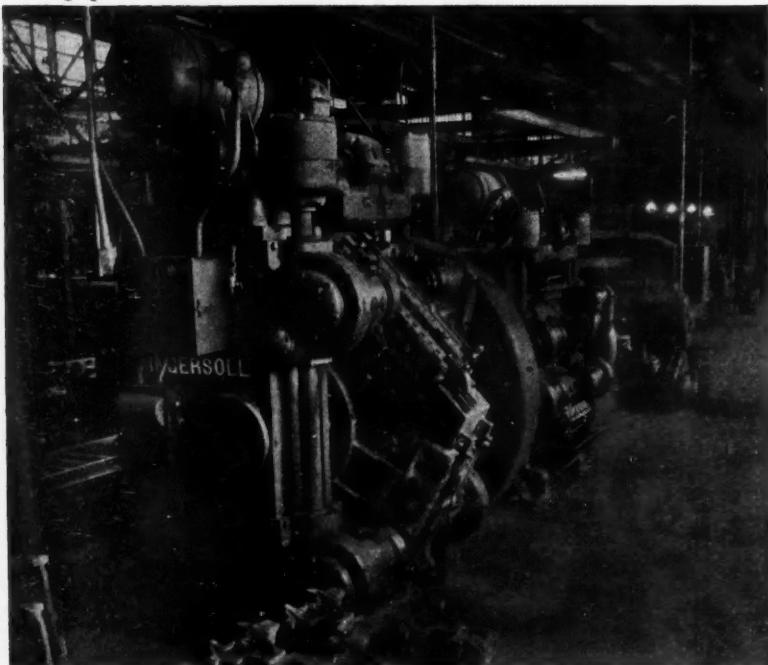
Five-spindle, drum-type Ingersoll roughs and finishes top and bottom faces of 8-cylinder block in one pass
